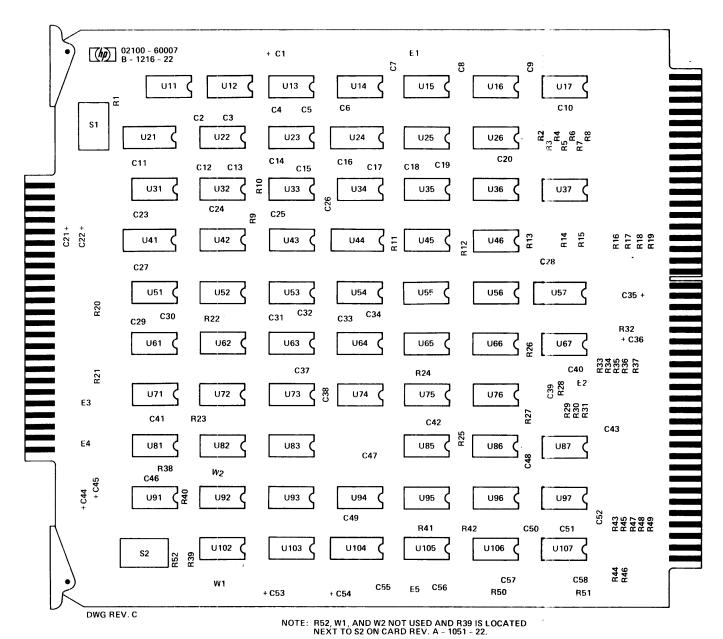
A8 I/O Buffer Card, Parts Location Diagram
